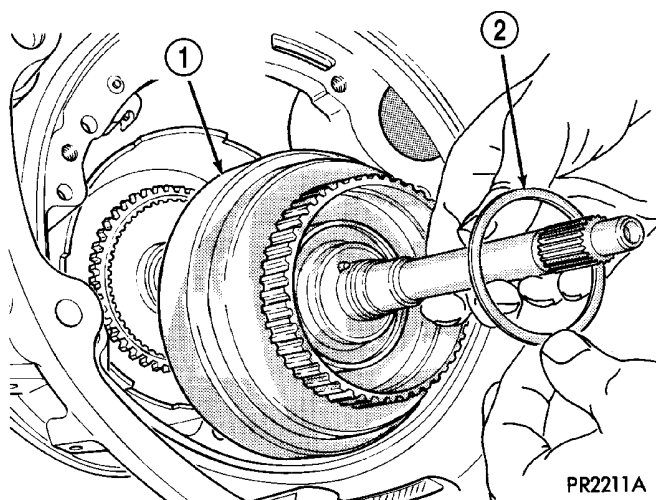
No. 2 Thrust Washer and Rear Clutch
